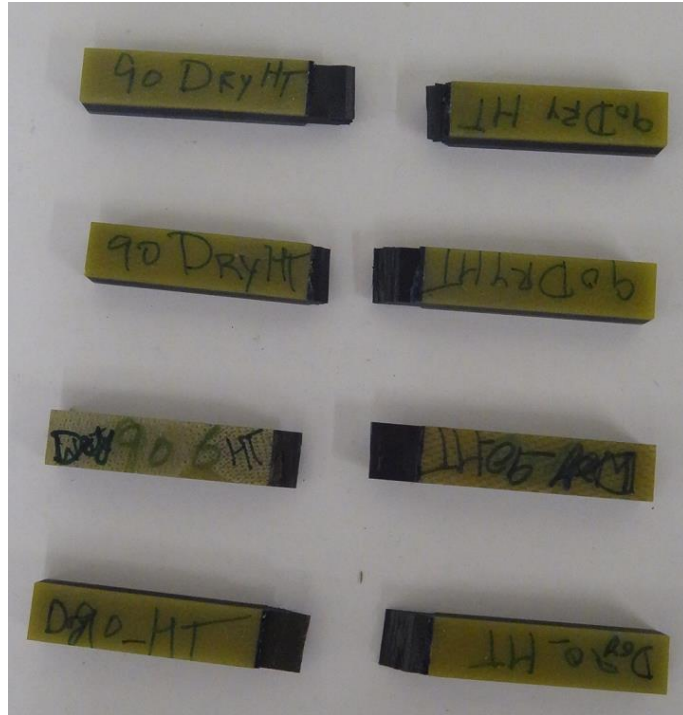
Failure surfaces of 90° orientation specimens for dry test at 80 °C
